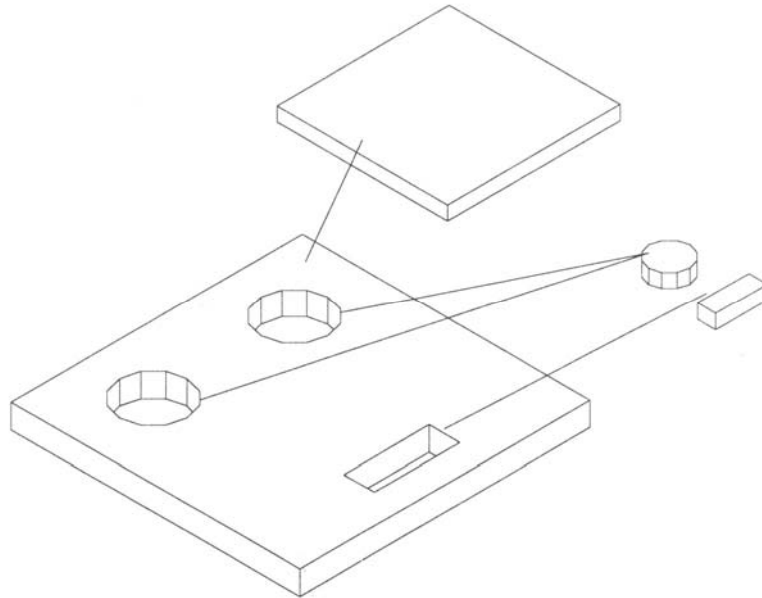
Implementation methods of design features in three-dimensional CAD design: a geometrical shape is cut with another. [Isotalo & al 1995 p. 29]
